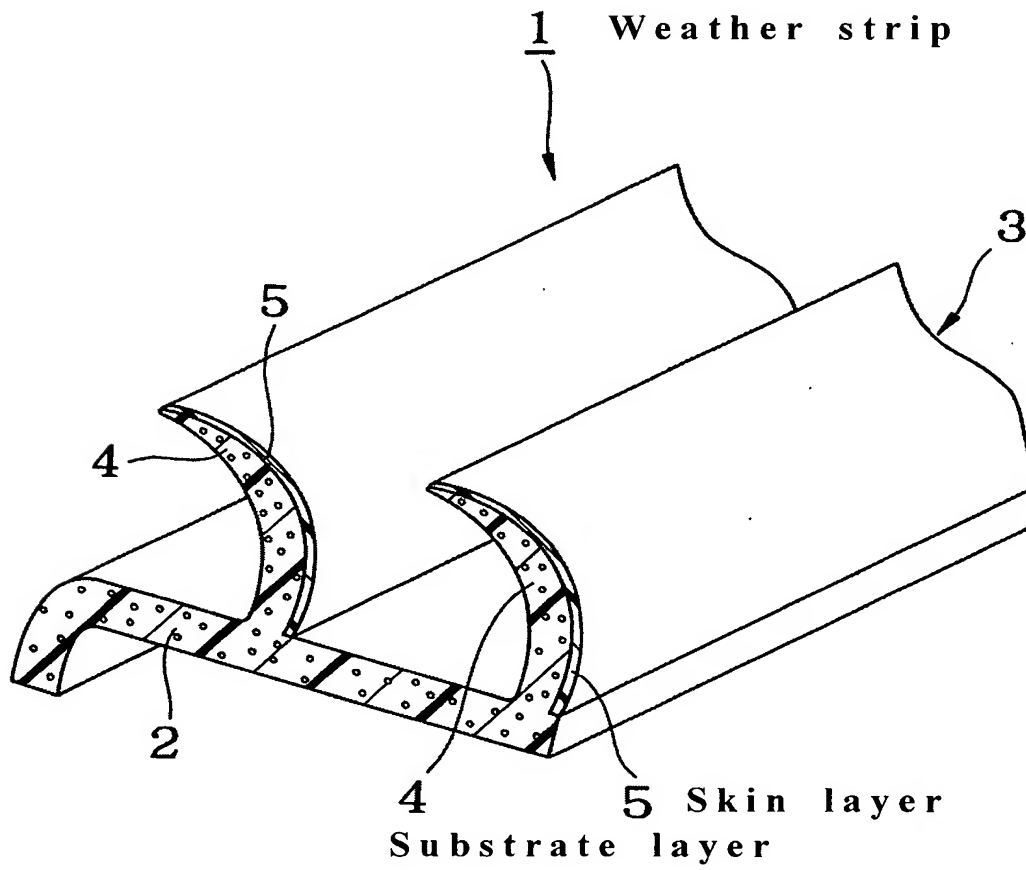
shows a weather strip comprising the foamed laminate based on olefin according to the present invention in a perspective view, in which a cross section is shown by the front face.
